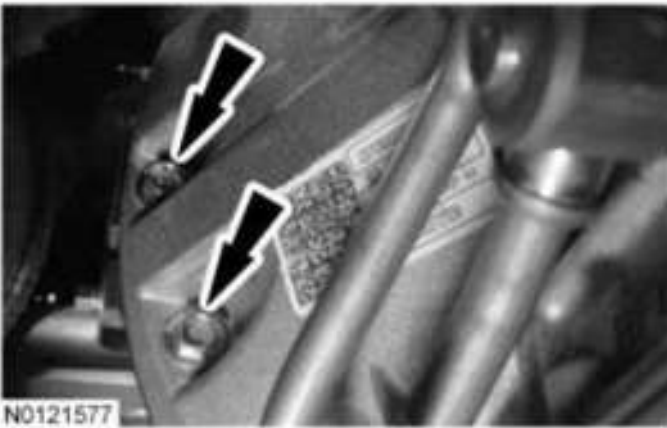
Locating LH Bell Housing-To-Engine Bolts
